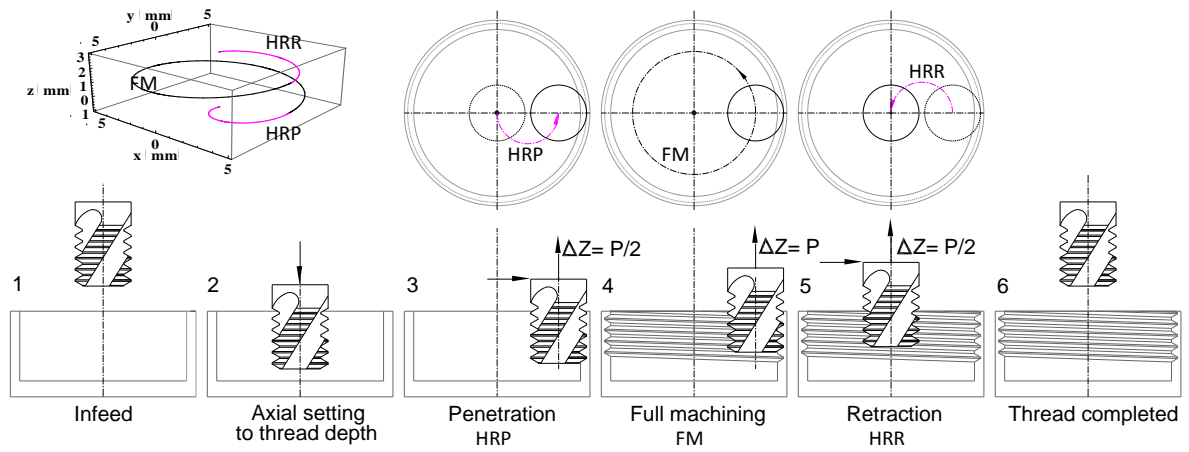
Steps in thread milling cycle for HRP (right hand thread, down milling)
